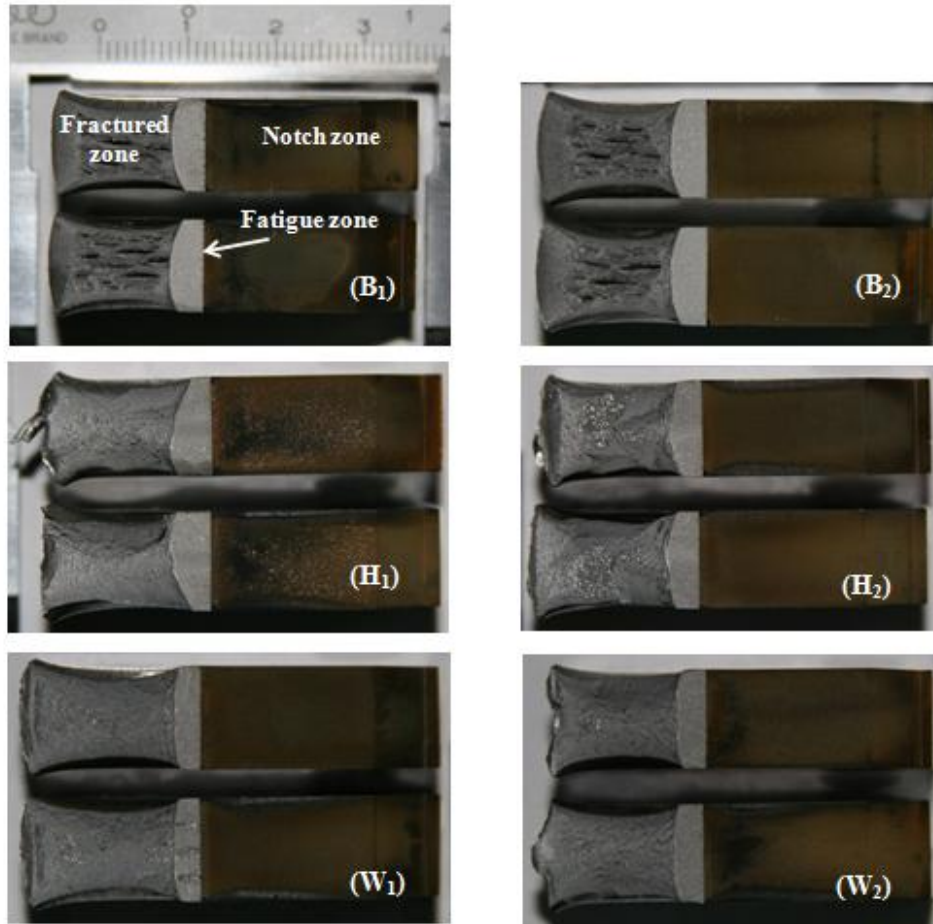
Fracture surfaces of three different zones of the samples, i.e., base metal (B), HAZ (H) and center weld (W).
